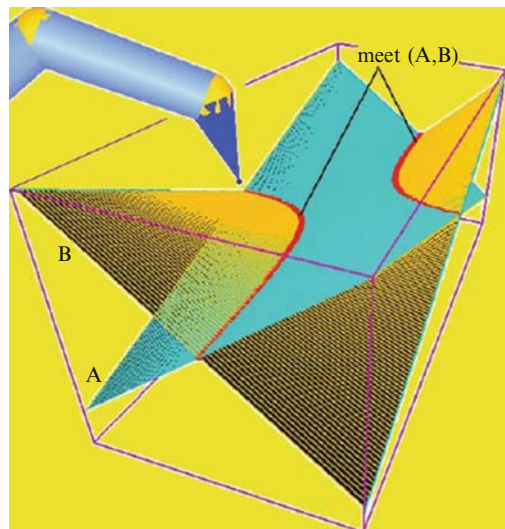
Robot arm welding with laser along the meet of two ruled surfaces
